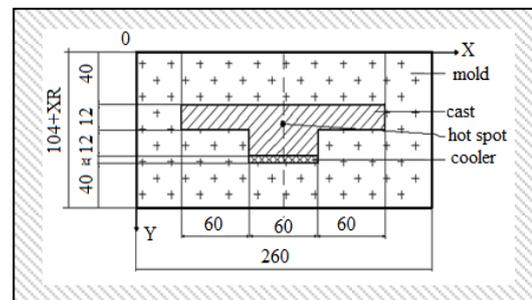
The mould – cast part – cooler assembly used in the simulation of solidification
